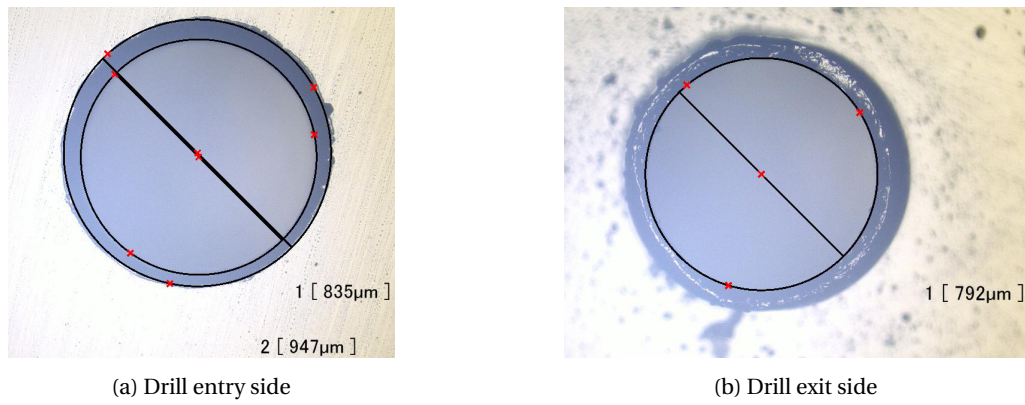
Microscope images of mechanically drilled holes with 0.8-mm drill
